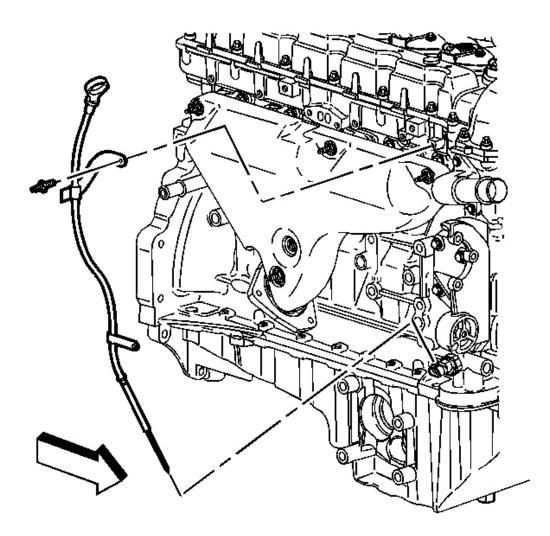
View Of Oil Level Indicator Tube Stud Courtesy of GENERAL MOTORS CORP.
